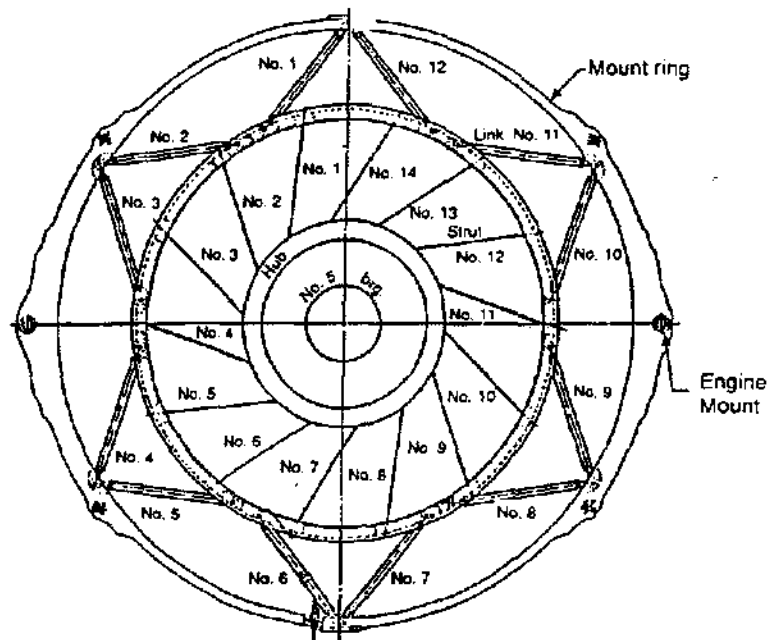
Turbine Frame Assembly-Fwd Looking Aft
